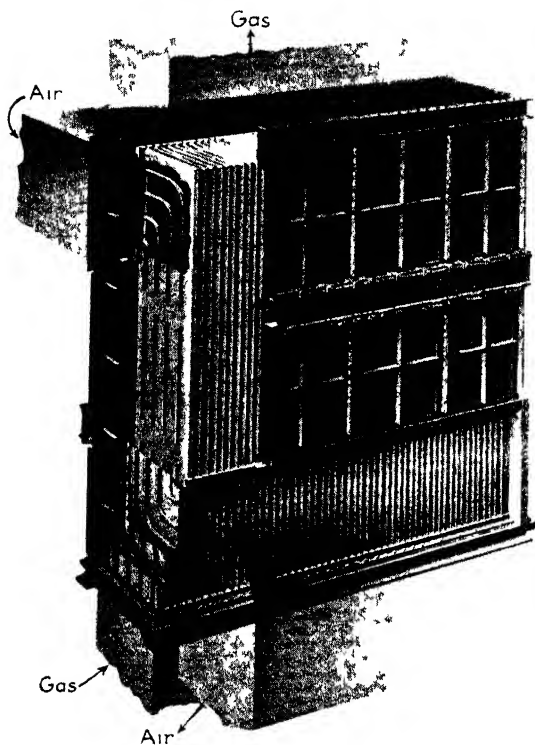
Plate type air heater (Combustion Engineering Co Inc)
